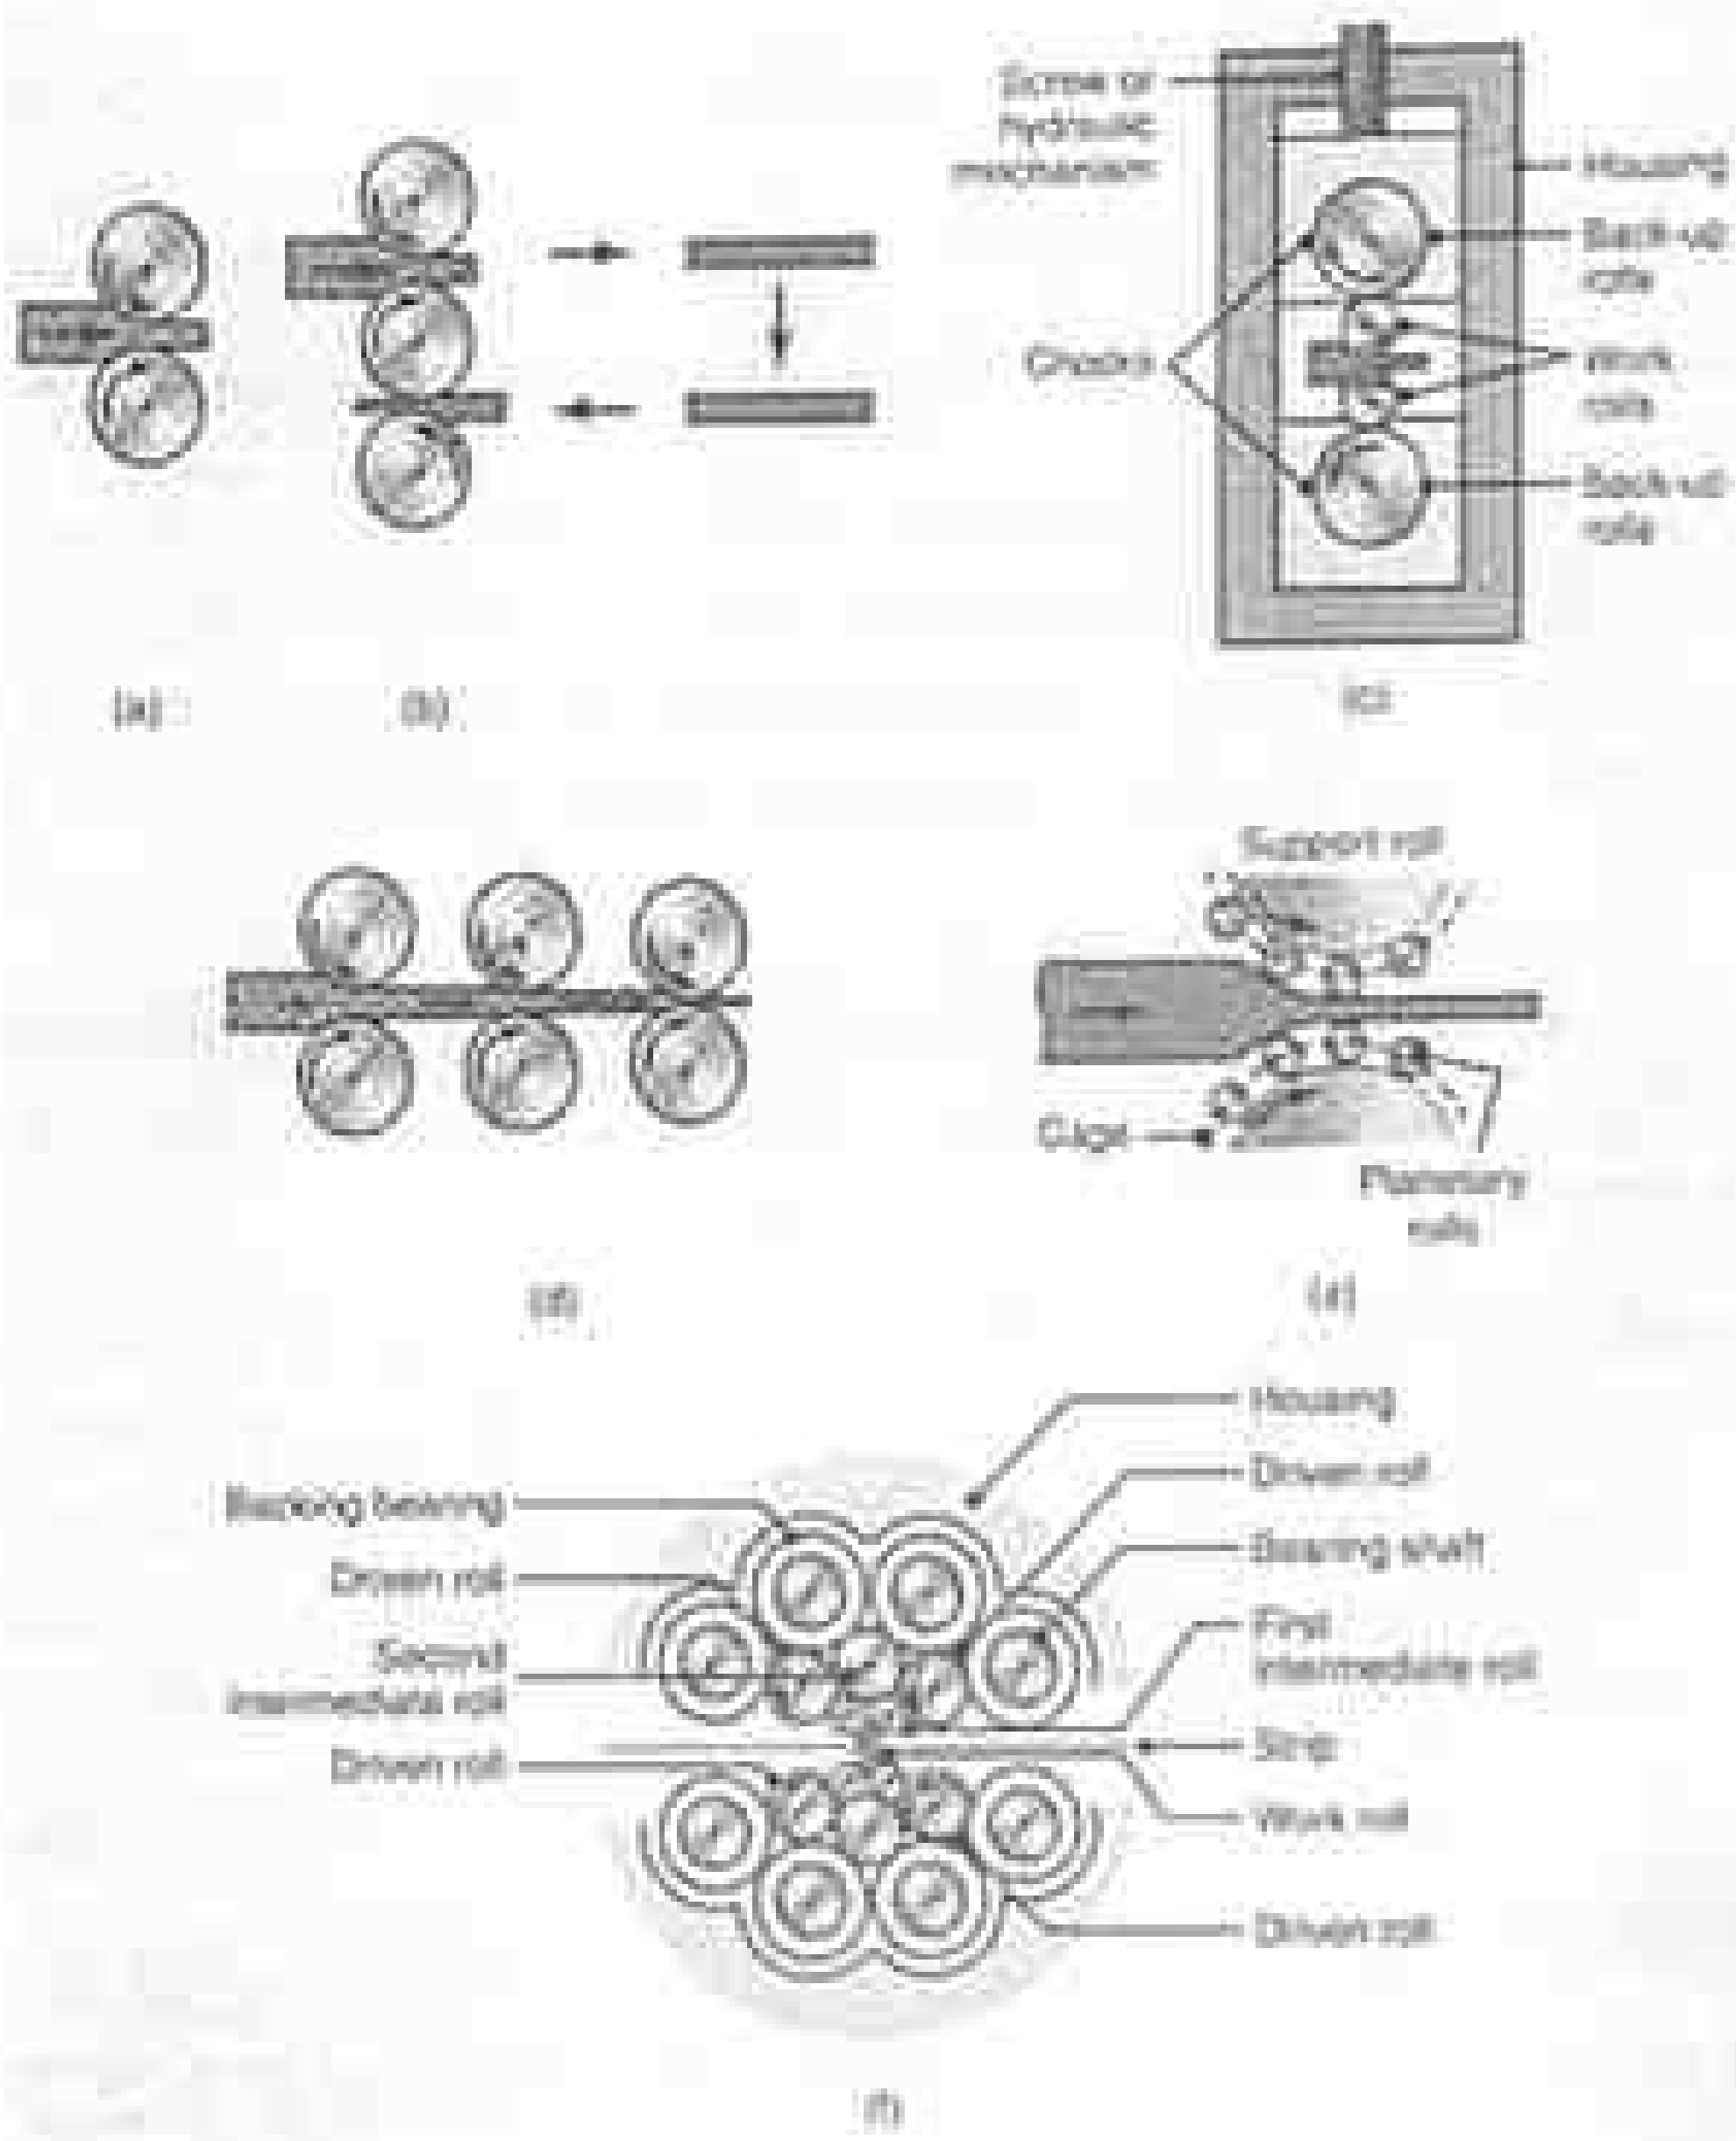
Schematic illustration of various roll arrangements: (a) Two-high mill; if a two-high mill is used for thick but short workpieces, it will commonly roll a billet back and forth in multiple passes, known as a reversing mill. (b) Three-high mill with elevator for multiple passes. (c) Four-high rolling mill showing various features; the stiffness of the housing, the rolls, and the roll bearings are all important in controlling and maintaining the thickness of the rolled strip. (d) Tandem rolling, with three stands. (e) Planetary mill, and (f) Cluster mill, also known as a Sendzimir or Z-mill.
